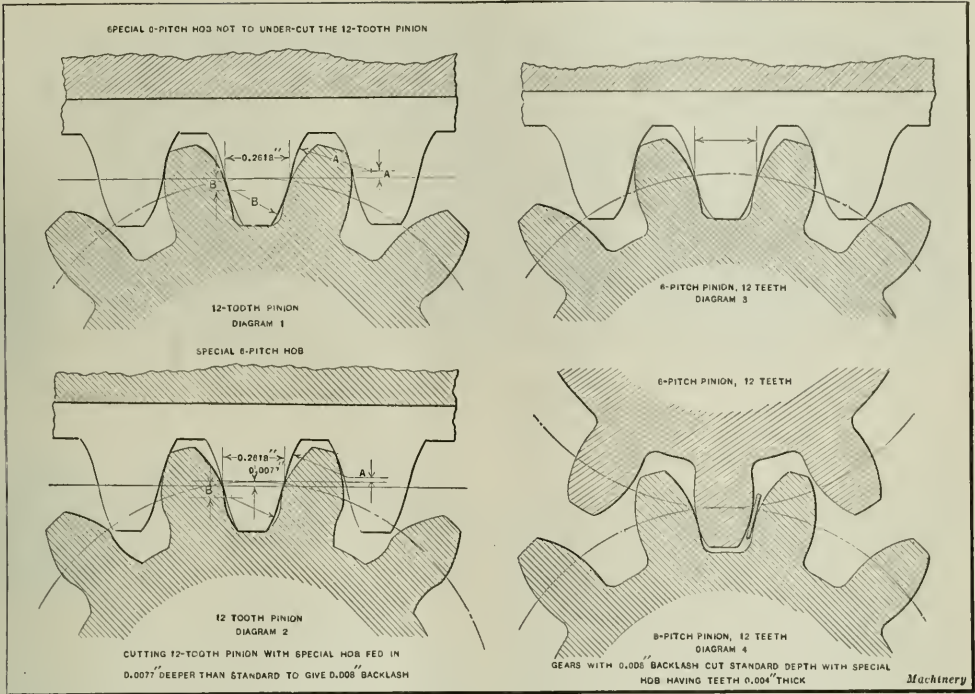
(Diagram 1) Cutting Twelve-tooth Pinion without Backlash by the Use of Special Hob. (Diagram 2) Cutting Twelve-tooth Pinion with Special Hob Deeper than Standard to give Backlash. (Diagram 3) Cutting Twelve-tooth Pinion with Special Hob having Teeth Thicker than Standard to give Backlash. (Diagram 4) Gears with Backlash, cut to Standard Depth with Special Hob having Teeth Thicker than Standard
